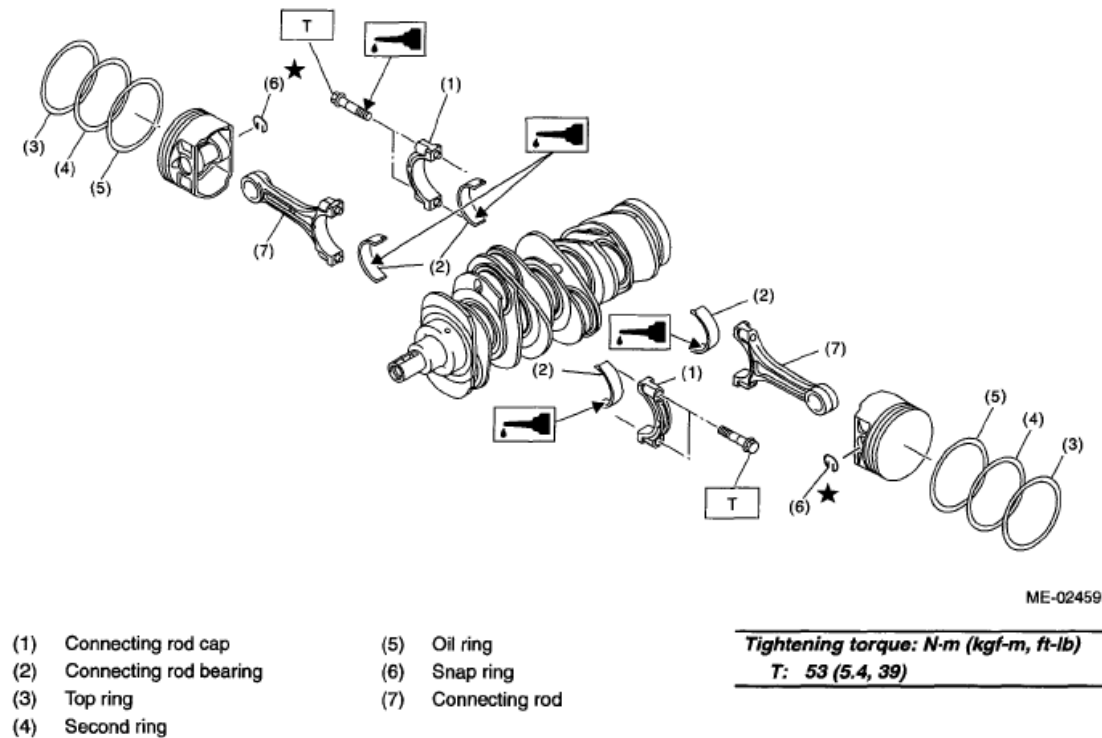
Exploded View Of Connecting Rod With Torque Specifications
